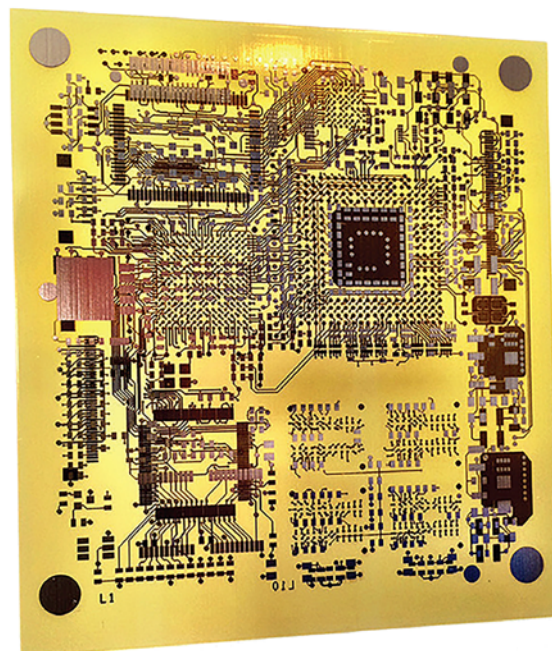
3D-printed multilayer board. (Source: Nano Dimension)
